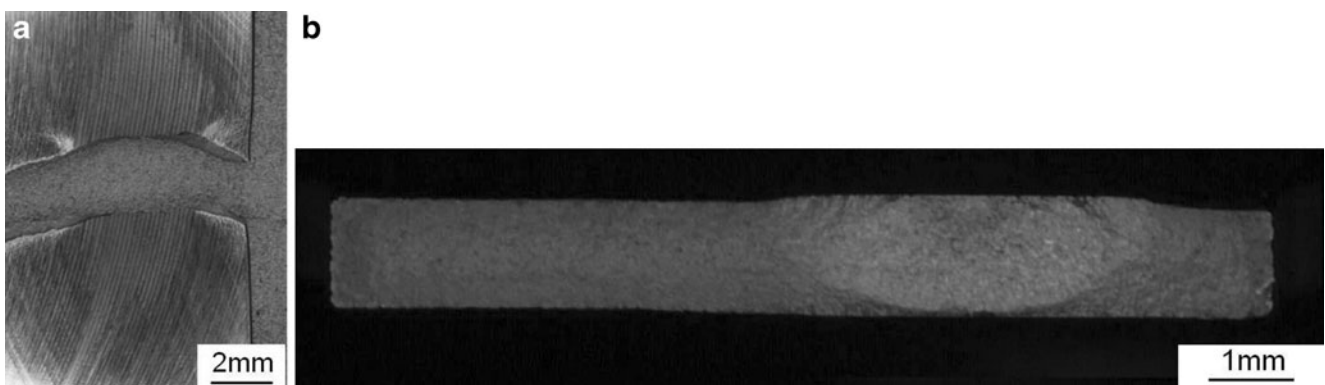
Typical fracture surface when a grinding mark is the crack origin. a Fracture location. b Fracture surface
